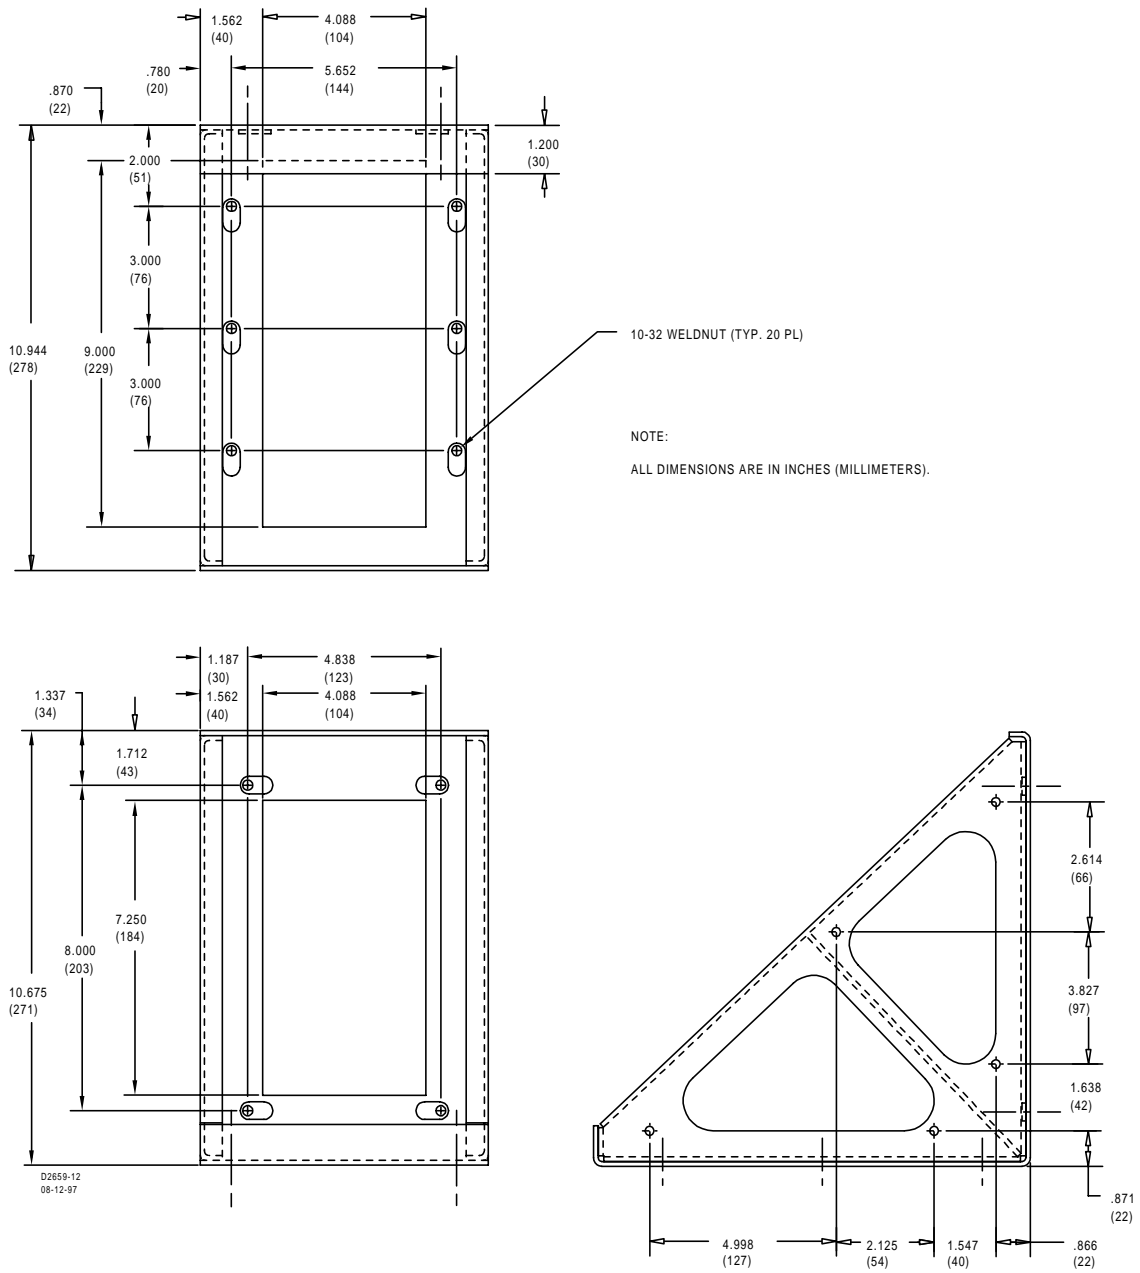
Optional Behind the Panel Mounting Kit Outline Drawing
